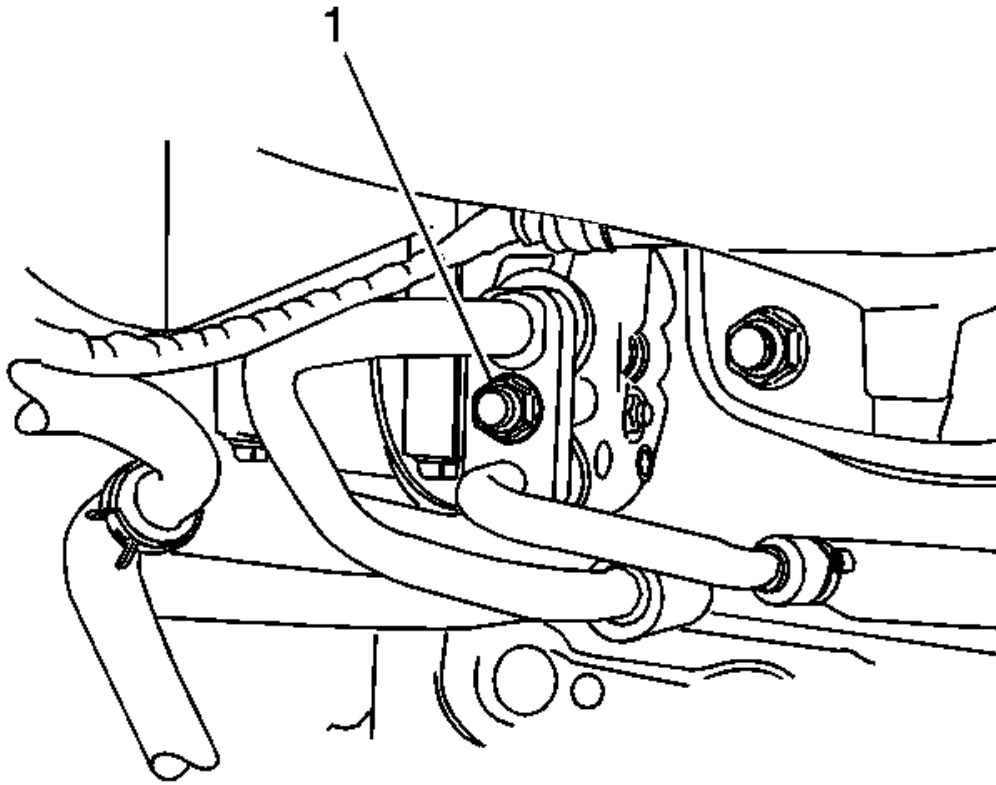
A/C Inlet/Outlet Pipe Tightening Bolt
